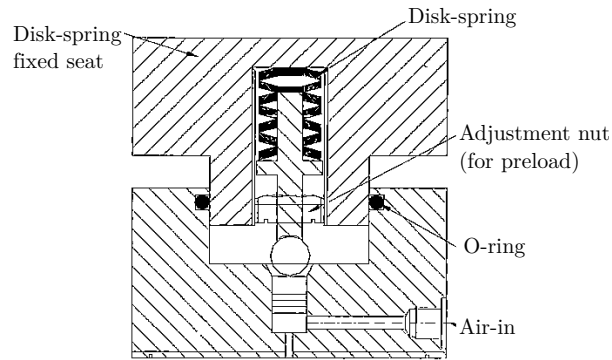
X-shaped groove aerostatic bearing with disk spring compensator (from [14])
